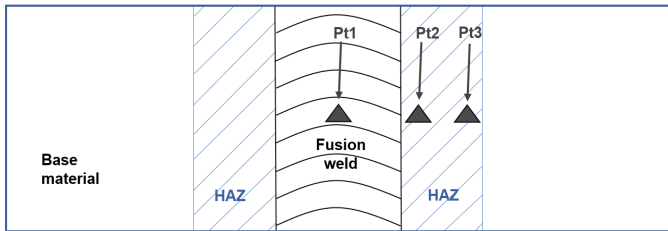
The locations of stress measurement points on the weld joints
